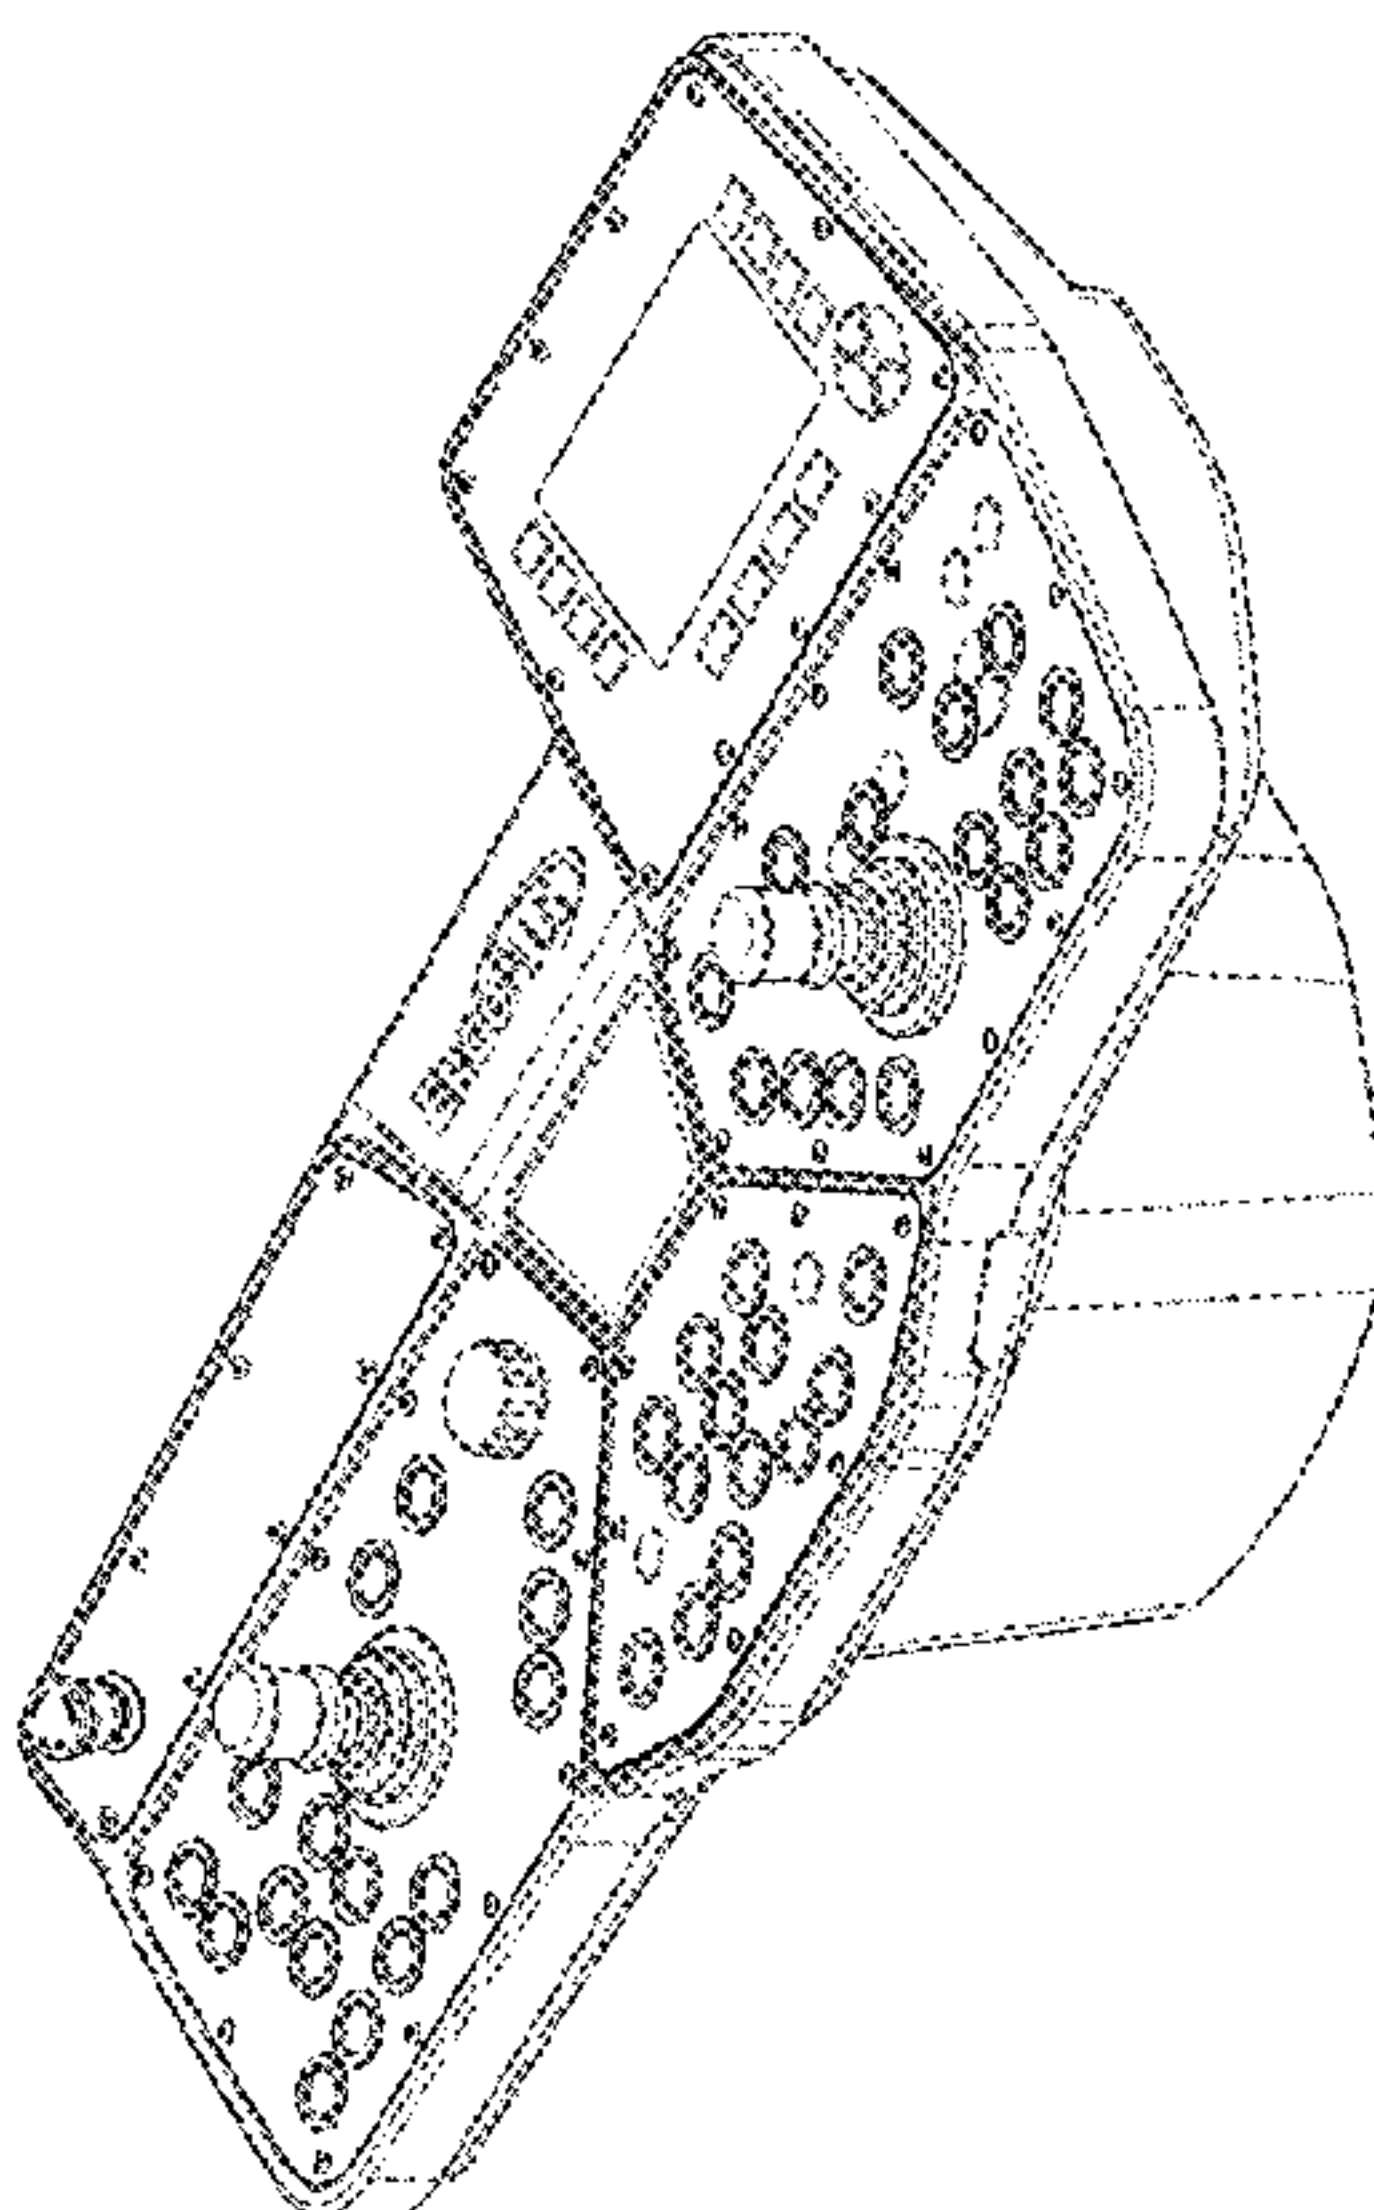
is a top side view of the design for a control panel for a road construction machine of FIG. 1.
